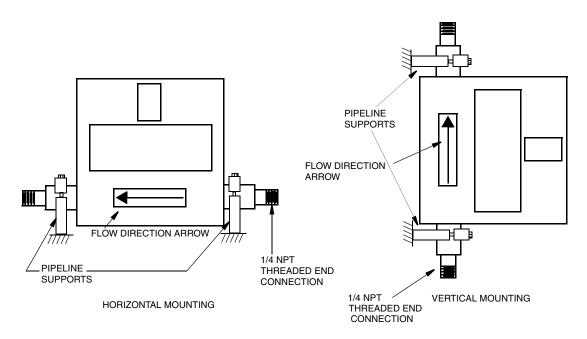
3 mm (1/8-inch) Flowtube Mounting
